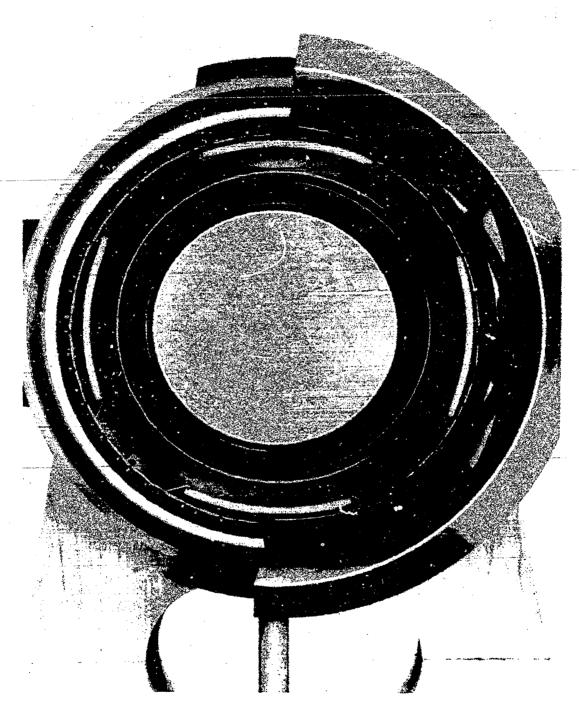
Workable 1/4-Scale Mockup of 4-Lobe Noise Suppressor - Rear View
